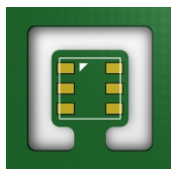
The top view of AHT20 printed circuit board, the design of the milling slit is added in the figure, The heat transfer can be reduced to a minimum.
